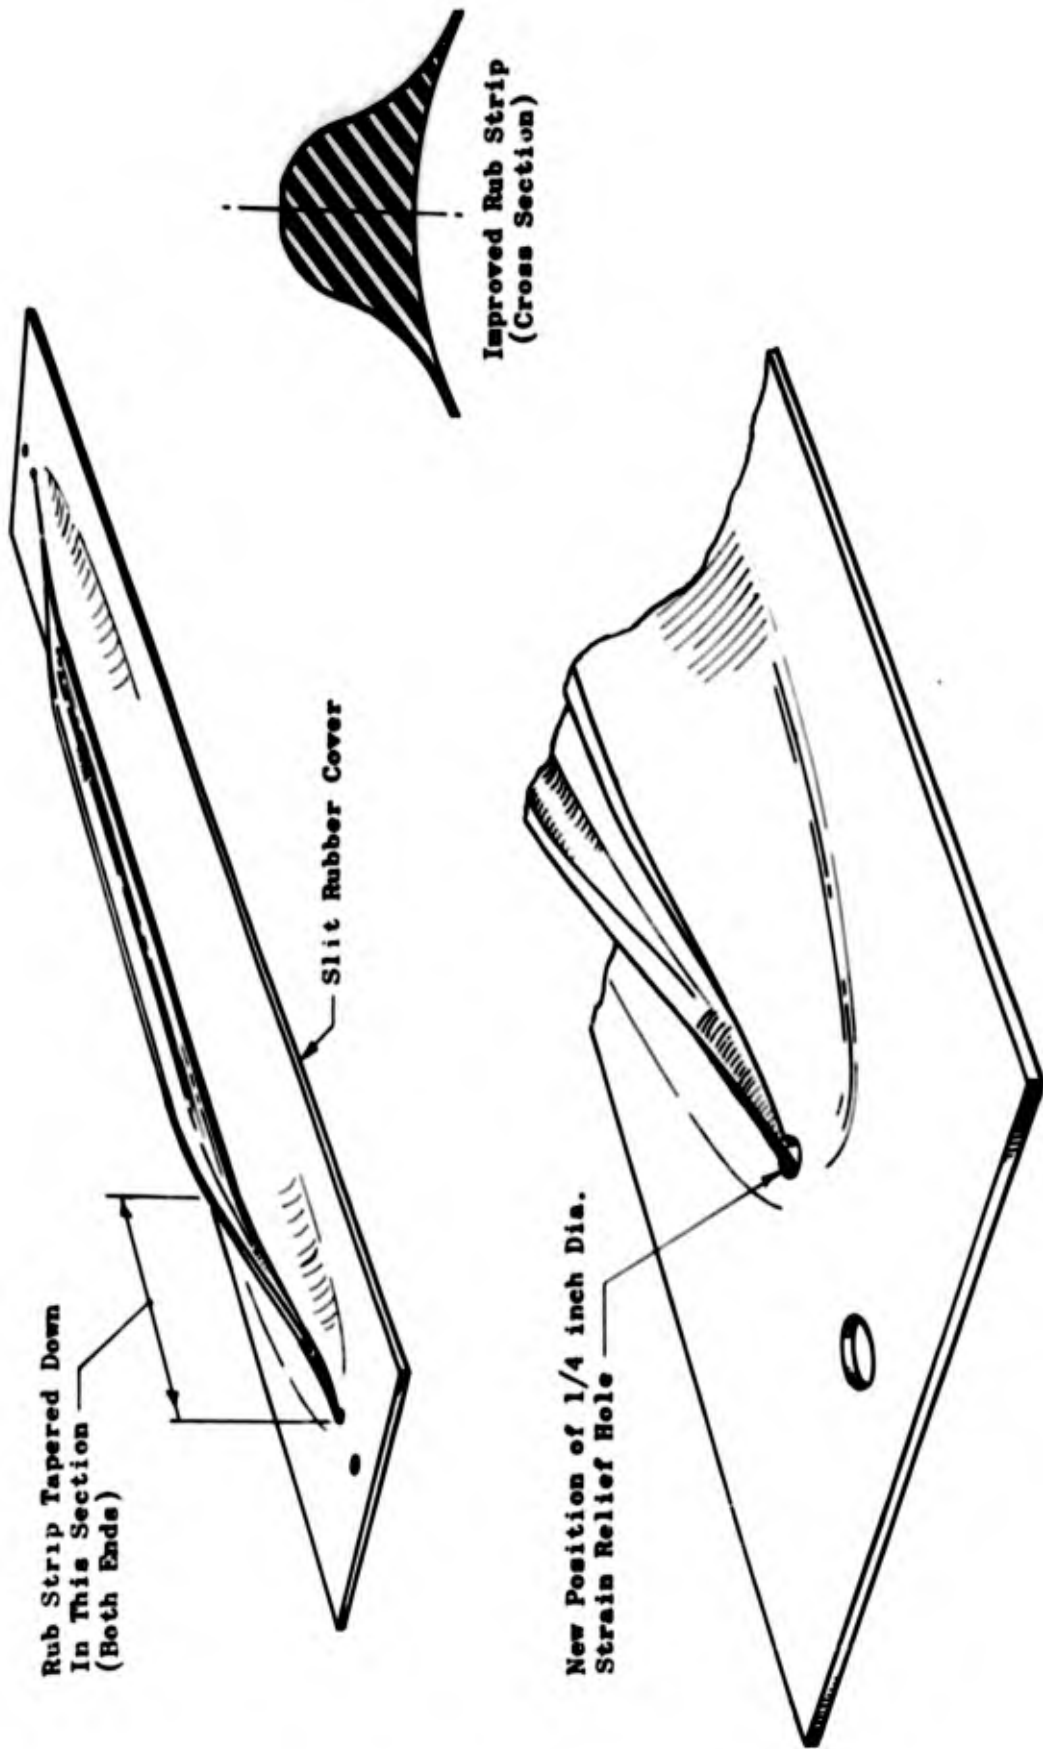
FINAL DESIGN MODIFICATIONS FOR TROUGH UNIT AIR BAG
